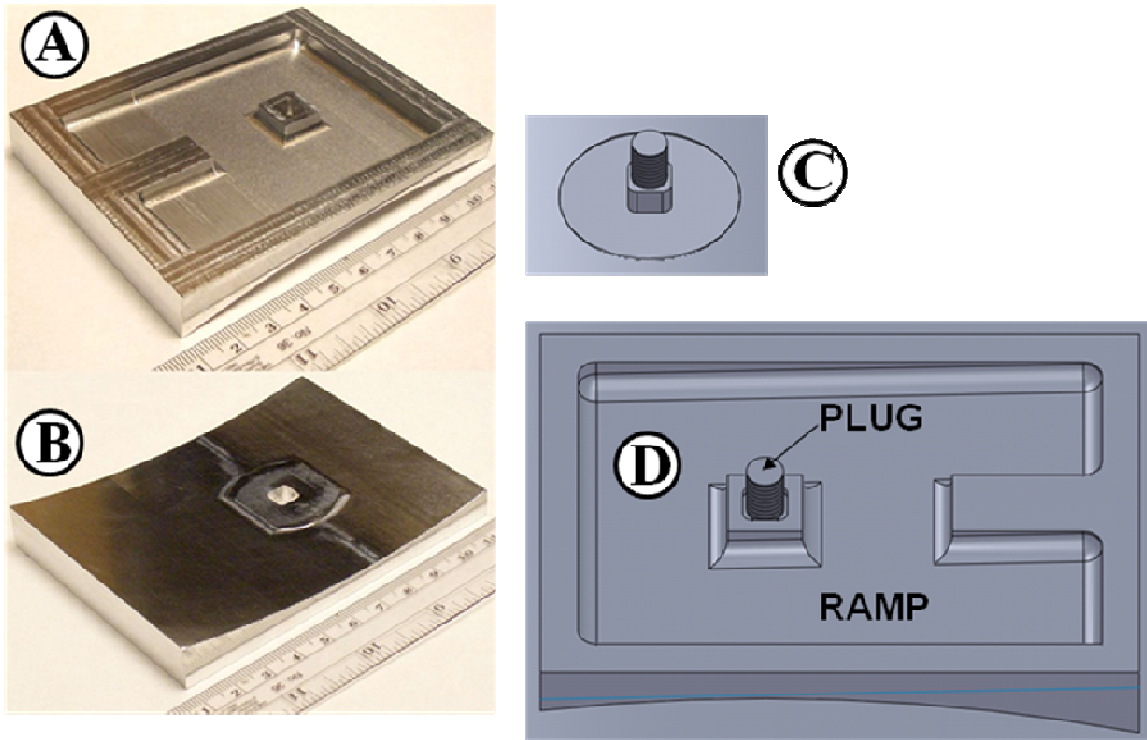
(A) Top view of ramp piece. (B) Bottom view of ramp piece. (C) Schematic of plug threaded inside the hole. (D) Ramp piece installed on tank surface.
